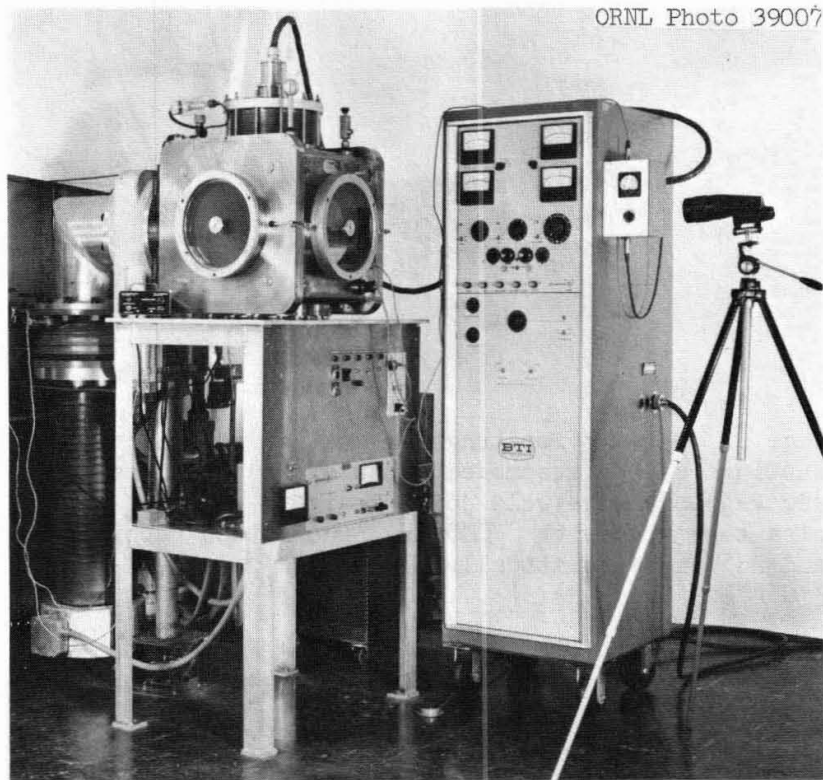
Electron-beam equipment set up for developmental welding.
